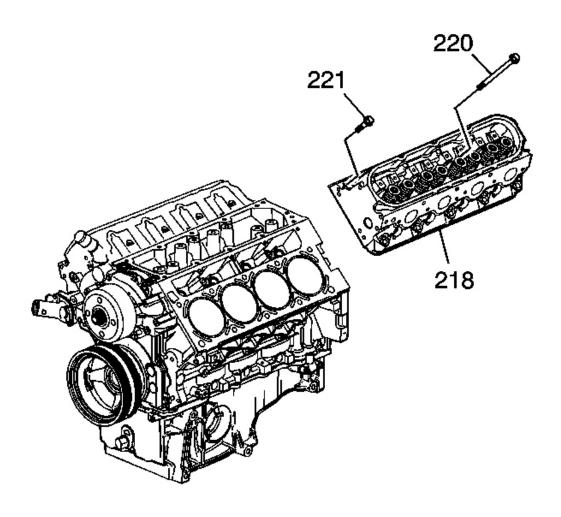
Cylinder Head Courtesy of GENERAL MOTORS CORP.
